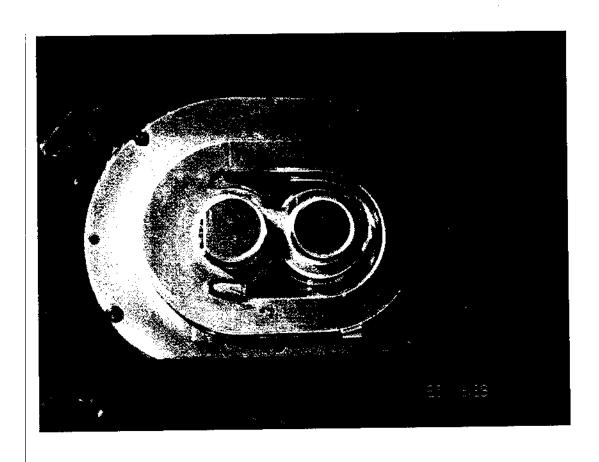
DRAG PATTERN OF FRONT BEARING HOUSING
